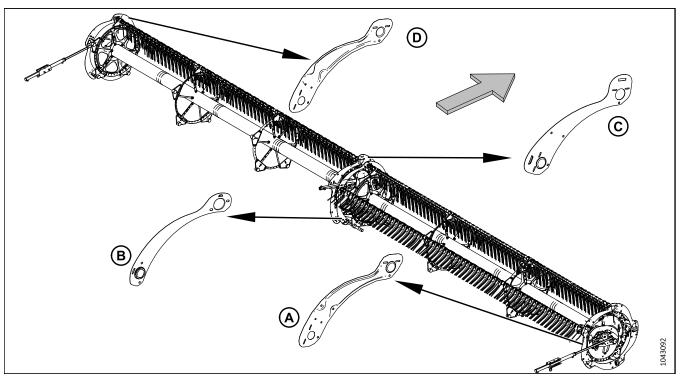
Reel Endshields - Double-Reel Endshield (Five-Bat Reel Shown)
